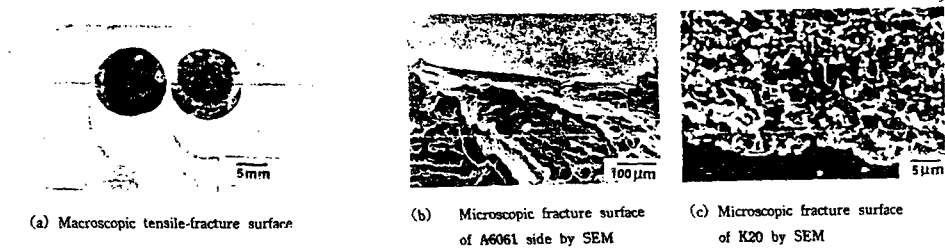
Macroscopic tensile-fracture surface and tensile-fractured fractographs of (K20-A6061) friction welded joint
